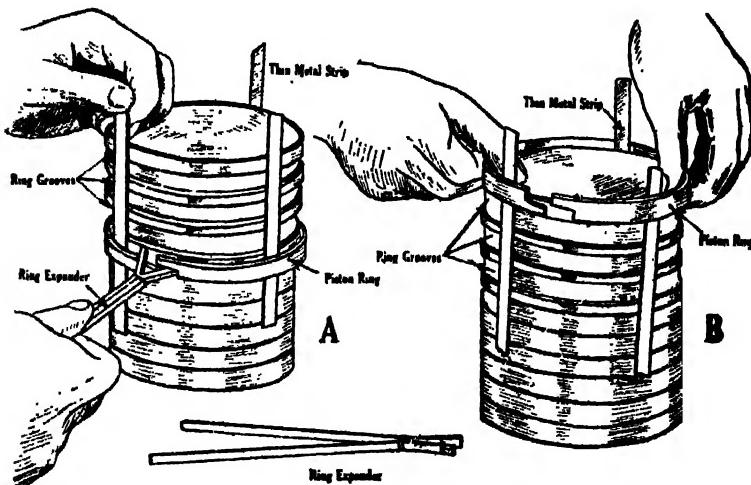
Simple Method of Removing or Installing Piston Rings.
